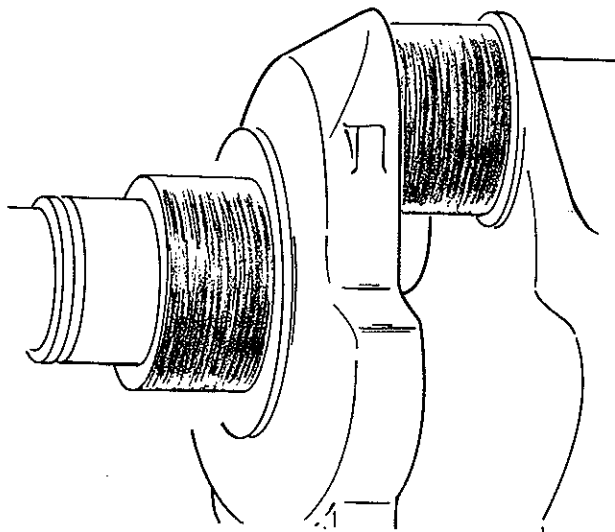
SCORED AND WORN CRANKPINS AND JOURNALS
